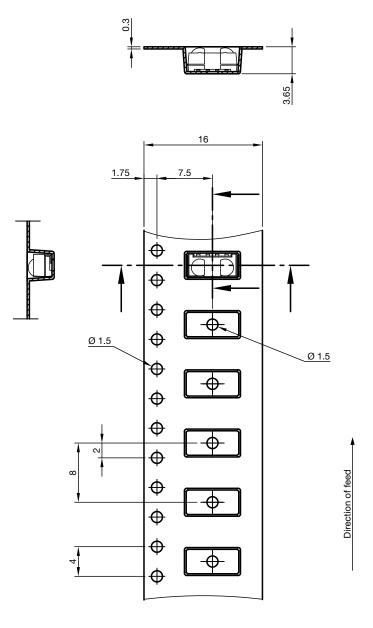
Issue: 2; 06.10.15 technical drawings according to DIN specifications
